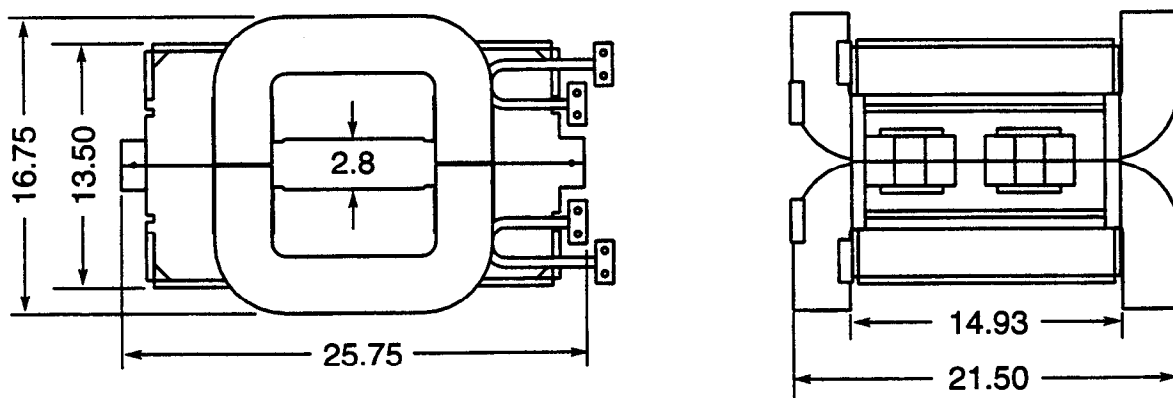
End and side views of the LER bending magnet. Dimensions are given in inches.
